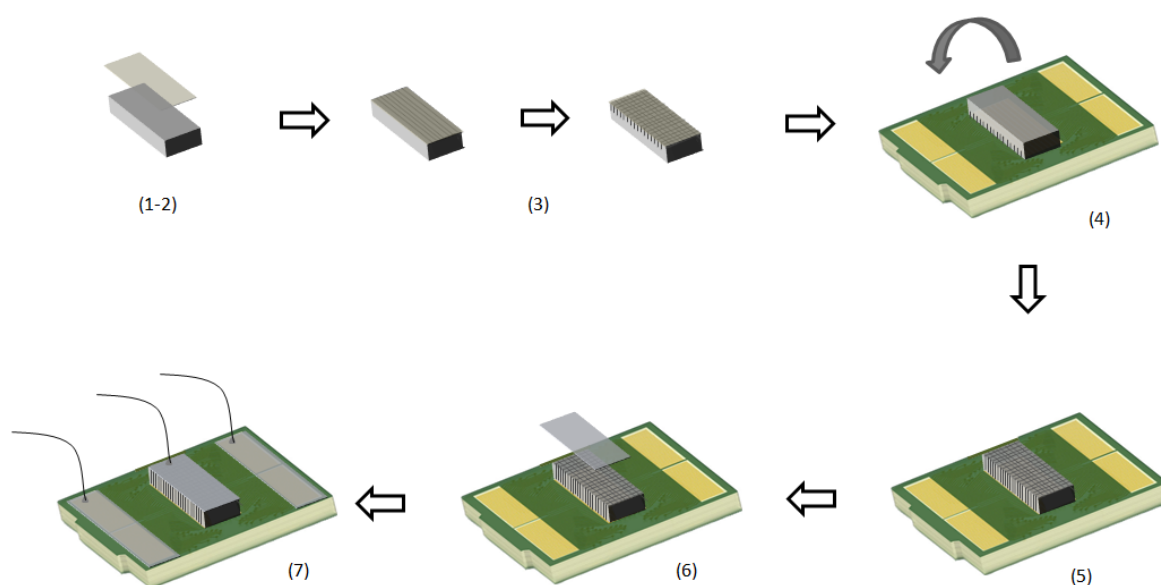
The Fabrication and Assembly Process of the Prototypes
